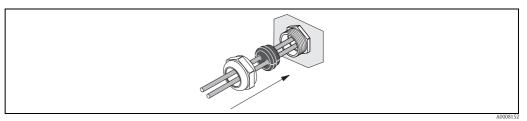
Cable gland for two connecting cables (2 \times Ø 4 mm / 0.16") per cable entry
